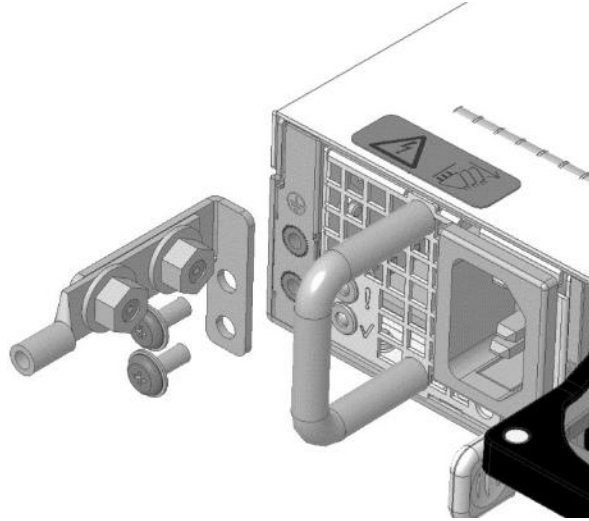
Connecting the Earthing Cable to the SSE-T8032S Switch
